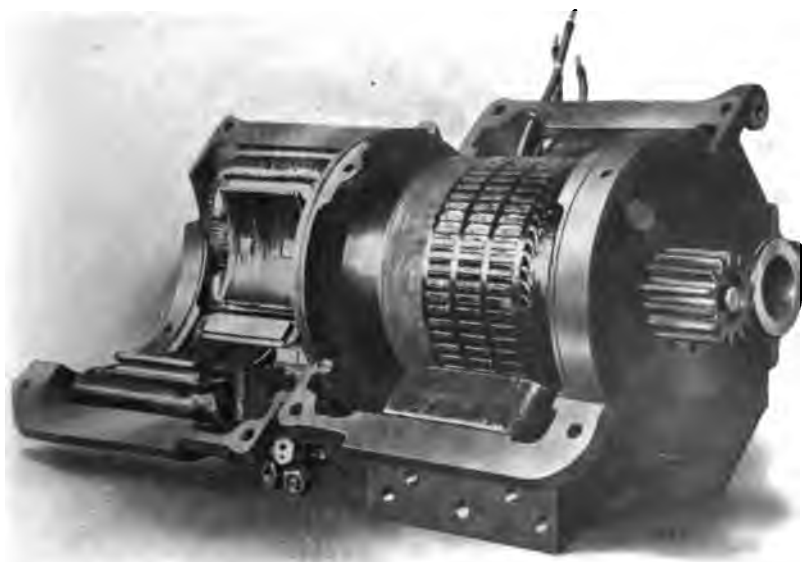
A 115-H. P. BALL-BEARING INTERPOLE MOTOR.
